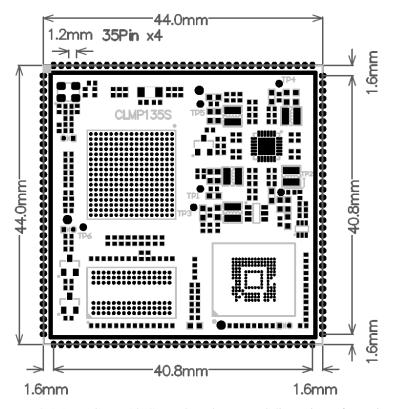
ATK-CLMP135S core board structural dimensions (front view)
